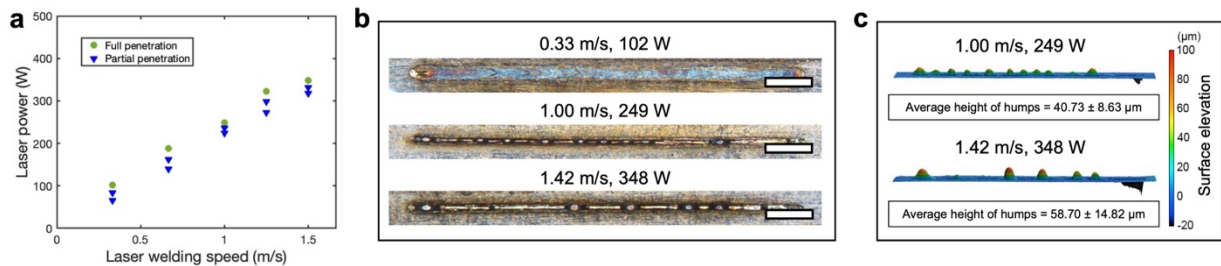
a The corresponding laser power at each welding speed was determined at EWI by incrementally increasing the laser power until full penetration was achieved. b Top surfaces of weld seams at the welding speeds of 0.33, 1.00, and 1.42 m/s. Note that the fastest speed was adopted as 1.42 m/s instead of 1.50 m/s due to the equipment setup at ANL. All scale bars correspond to 500 μm. c Surface topography of weld seams at 1.00 and 1.42 m/s, and the average hump height relative to the weld top surface.
